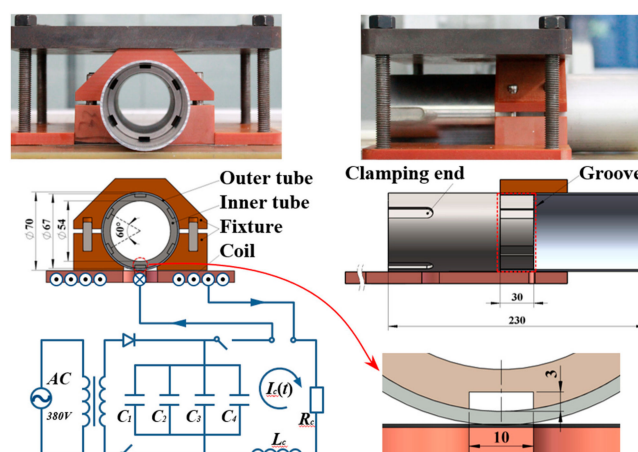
Setup for electromagnetic crimping and the size of specimens (dimensions in mm).
